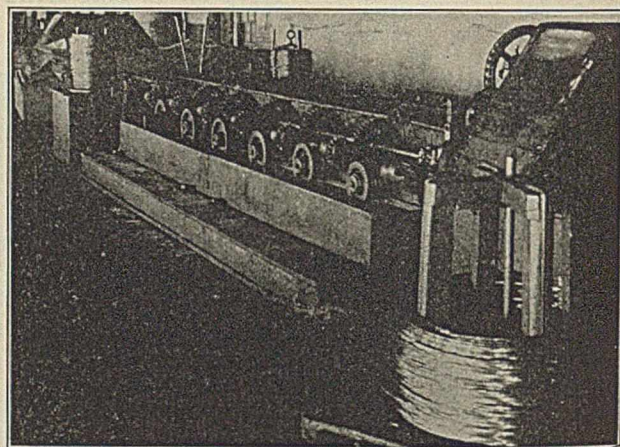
CONTINUOUS WIRE-DRAWING MACHINE
